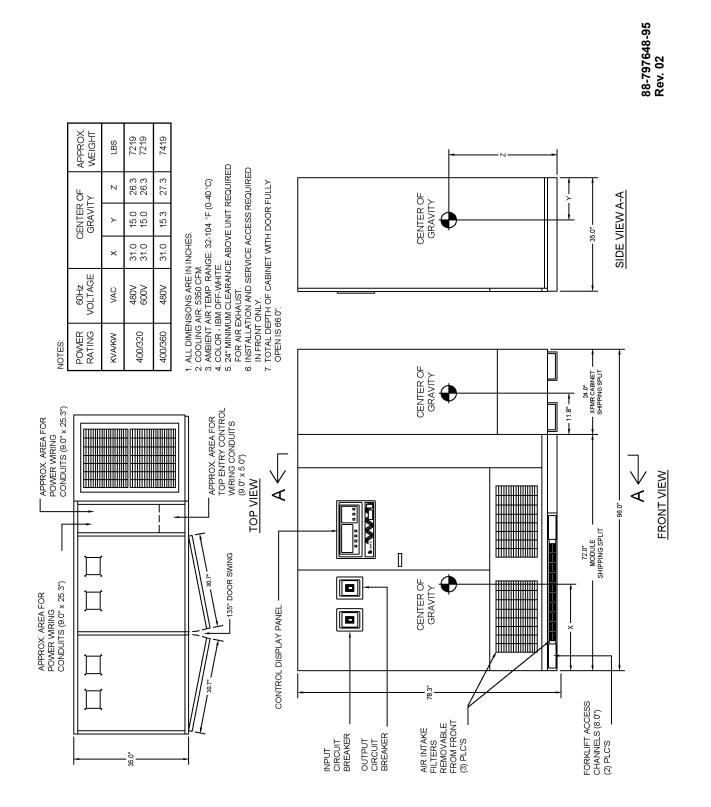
Outline drawing, 450kVA Multi-Module UPS, 480V input, 480V output
